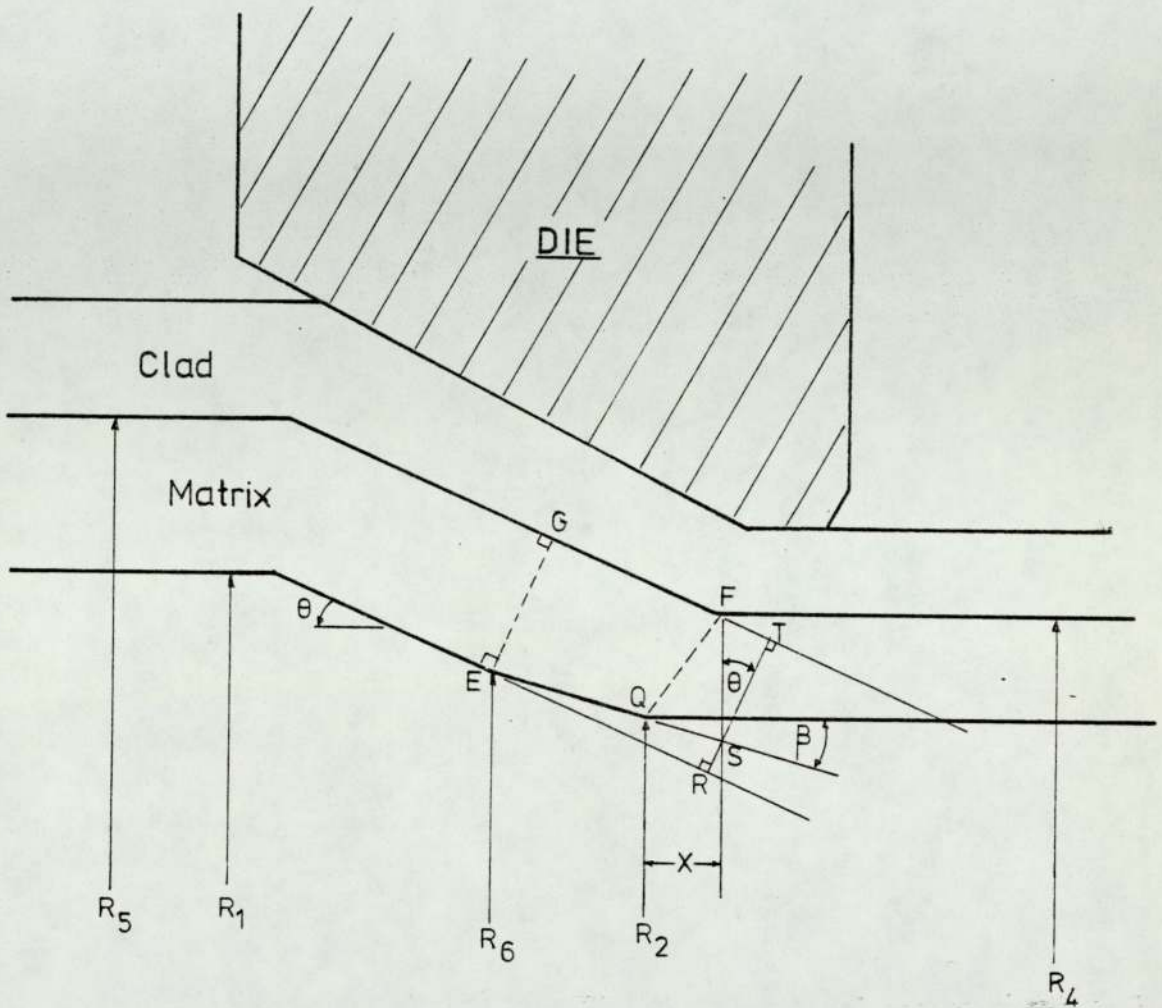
BIMETAL TUBE DRAWING ON A FLOATING PLUG
